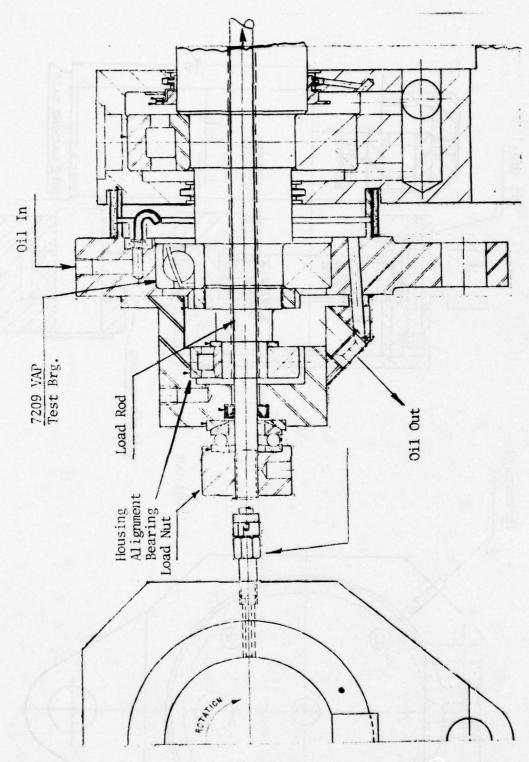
SKF Endurance Test Machine Details of Test Hardware for Angular Contact Ball Bearings
